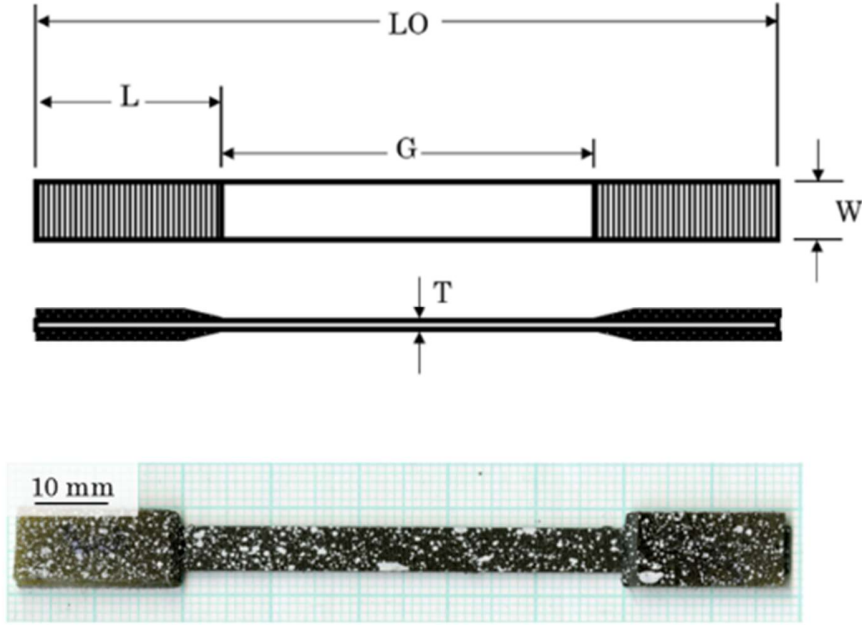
a) Schematic of the tensile test specimen geometry annotated with dimensions. b) composites test specimen prepped for mechanical testing.
